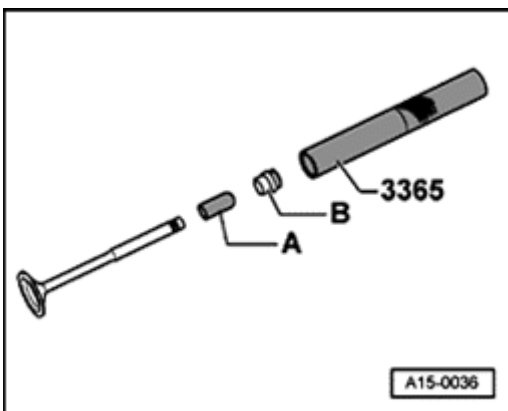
Placing Plastic Sleeve On Valve Stem & Placing Valve Stem Seal In The Tool 3365
